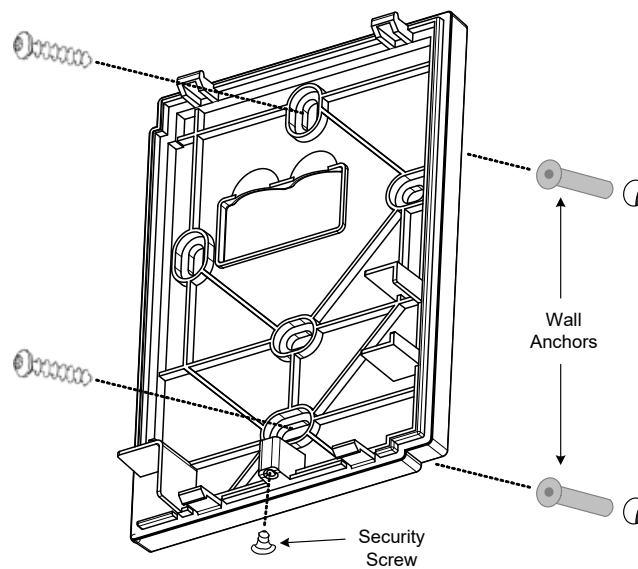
Mounting an Allure EC-Smart-Vue Sensor
